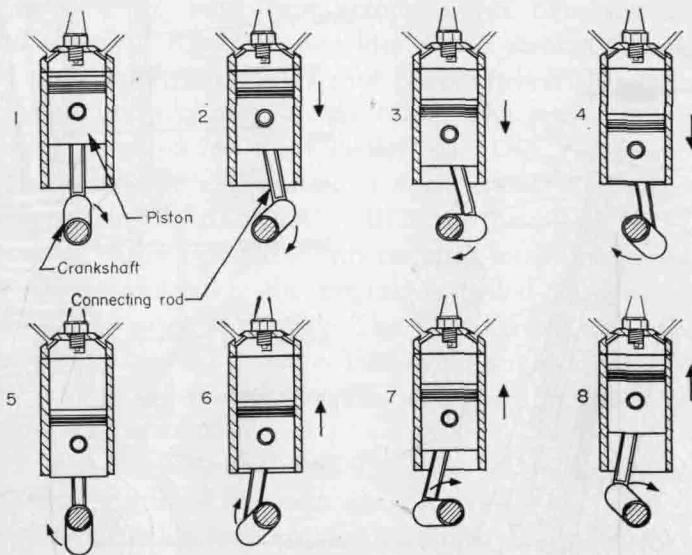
Sequence of actions as crankshaft completes one revolution and as piston moves from top to bottom to top again.
